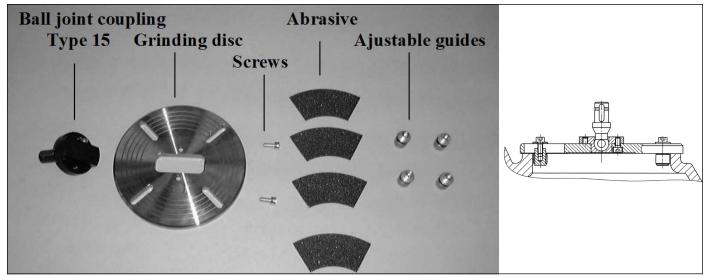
TOOL COMPONENTS FOR HAND-HELD OPERATION WITH BALL JOINT COUPLING TYPE 10 (SOLID GRIND-ING DISC WITH ADJUSTABLE GUIDES)
